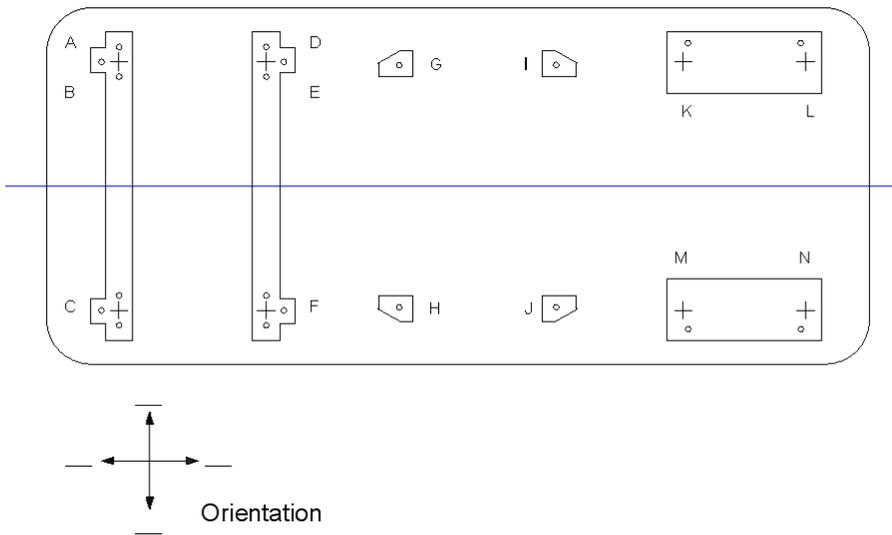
Typical Baseplate or soleplate Layout for Elevation and Level Measurement
